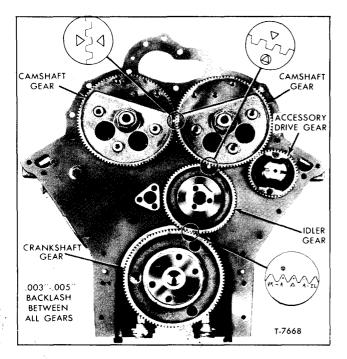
Advanced Timing on 6V-53 Diesel Engine
